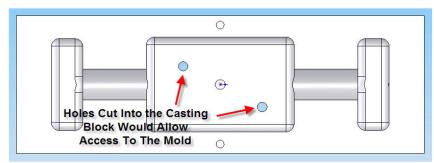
Casting Block with Holes Punch through for Easier Removal
